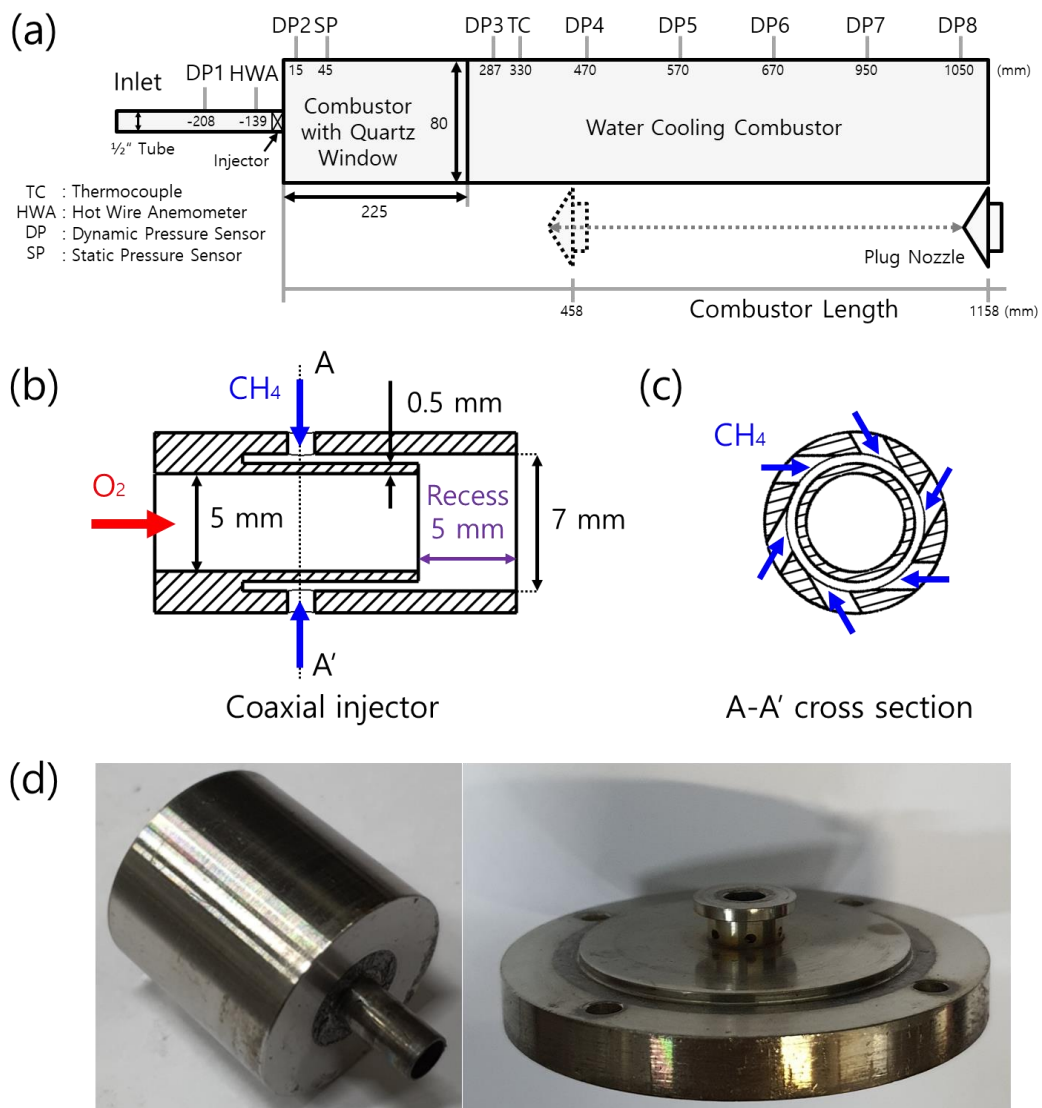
Schematic diagram of (a) measurement sensor locations, (b-c) cross-sectional view of injector, and (d) direct photo for each part of the injector.
